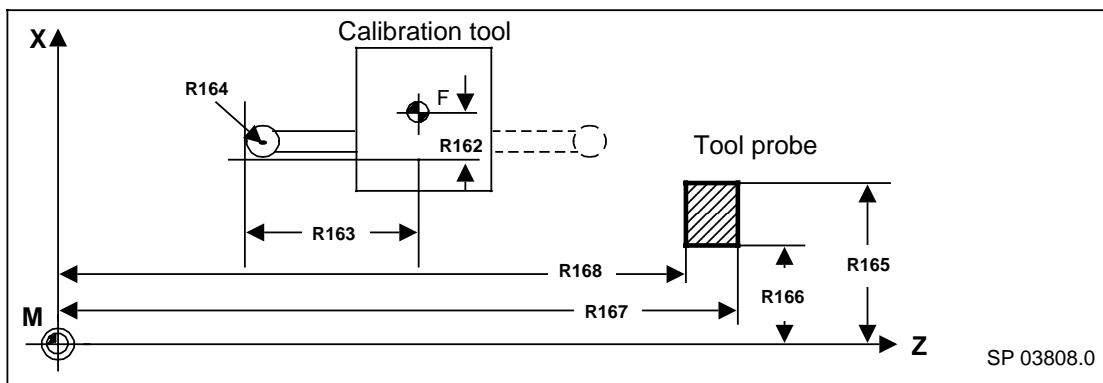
Overview MDC: Tool probe: Calibration tool (Z axis mirrored)
